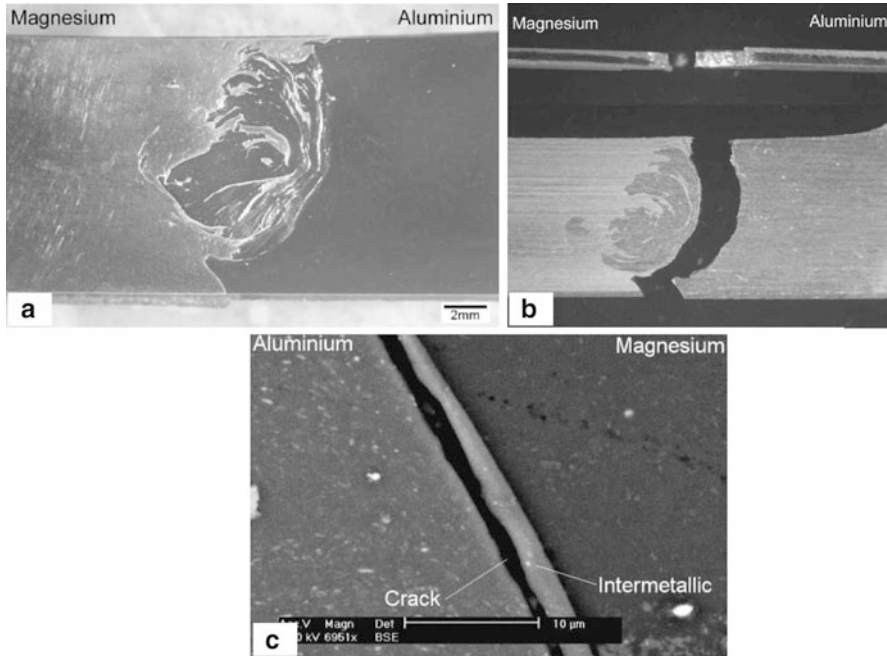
(a) A dissimilar friction stir weld between AZ31B (retreating side) and 6061Al (advancing side), (b) fractured weld as a result of side bend test, and (c) location of the crack in the weld (McLean et al. 2003, reprinted with permission from Maney Publishing)
